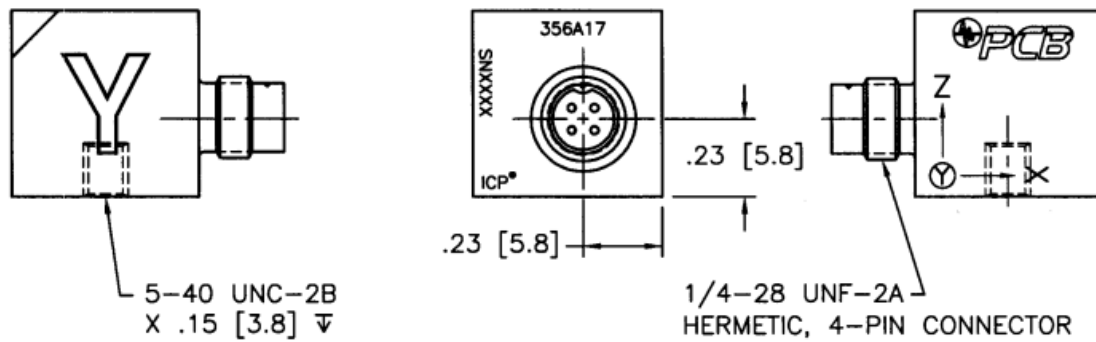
Product drawing from [www.pcb.com](http://www.pcb.com)
